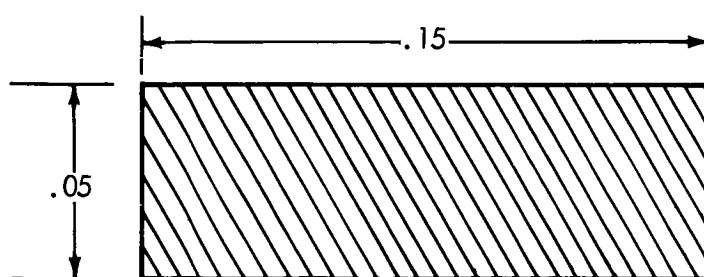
Primary Ring in Plane Cross-Section
